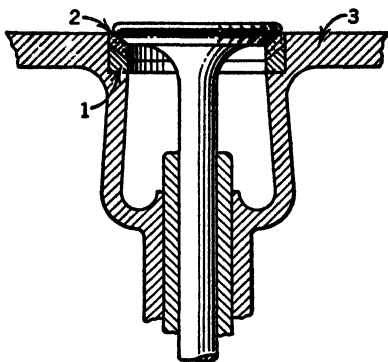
Cross Section of Auto-Engine Valve Seat Showing Composite Insert of Low-Expansion (Invar type) Cast Iron (Item 1) Coated with Hard Heat-Resistant Layer of Stellite (Item 2) in Gray-Iron Cylinder Block Casting (Item 3). (Courtesy Wierer and Day, International Motors Corporation)
